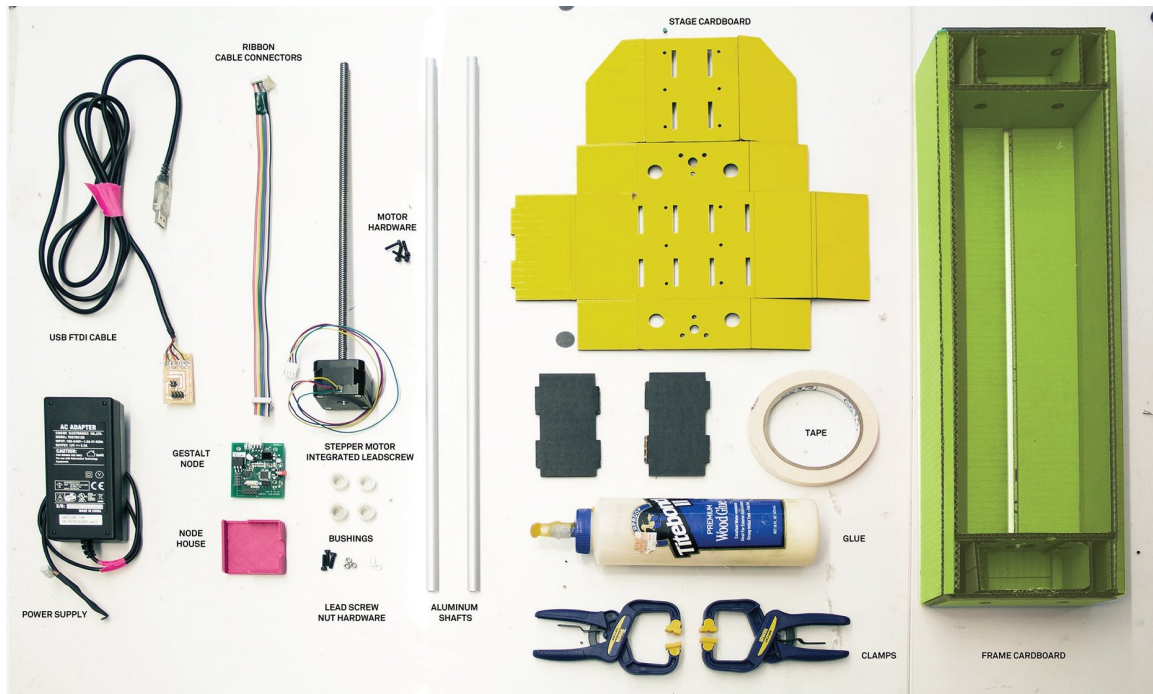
The parts for making the linear cardboard machine monomers, including bushings, guide shafts, stepper motor, control nodes, cabling, and power supply.
